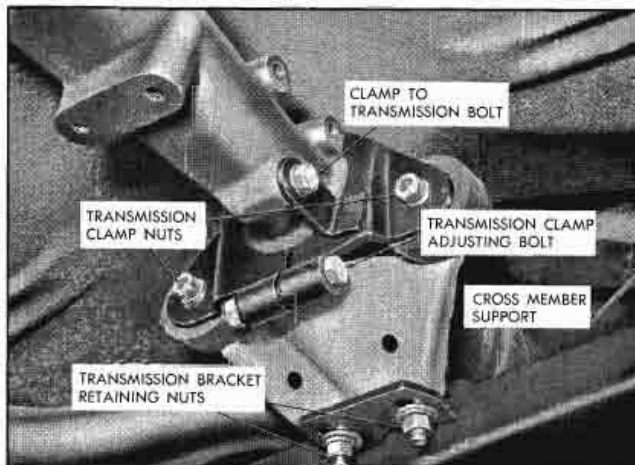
Rear Engine Mount—Synchro-Mesh
